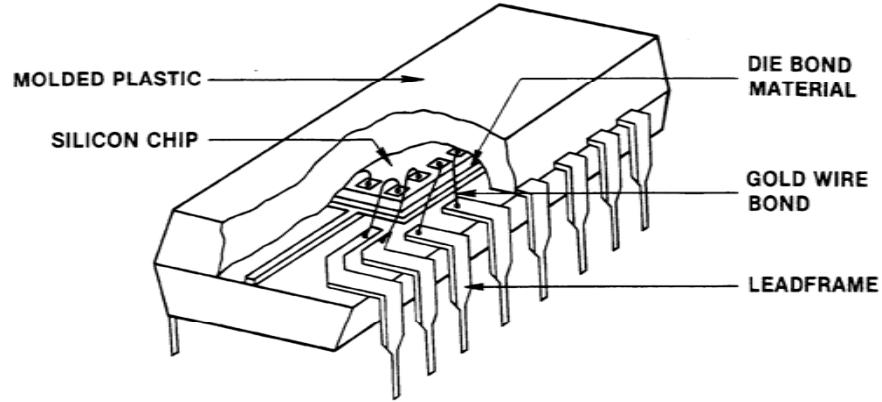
Cutaway view of a postmolded plastic package in the configuration of a dual-line package (DIP).
